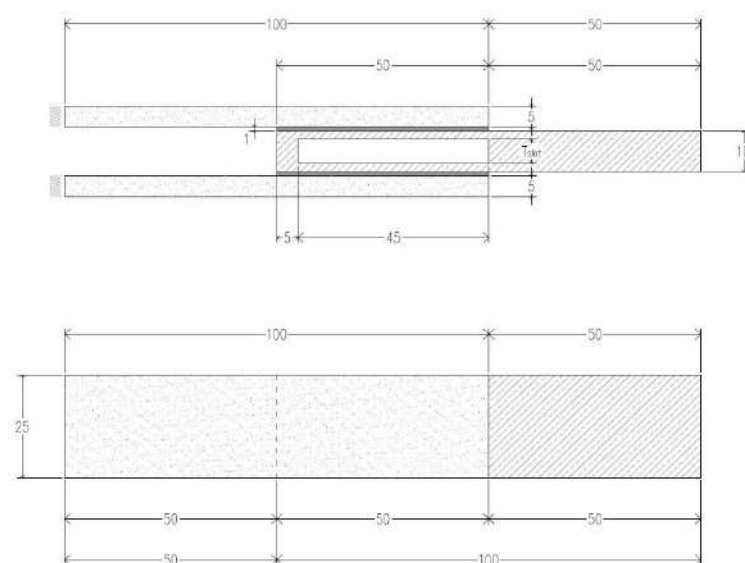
Double-lap joint geometry: section and plan view (measures in mm)
